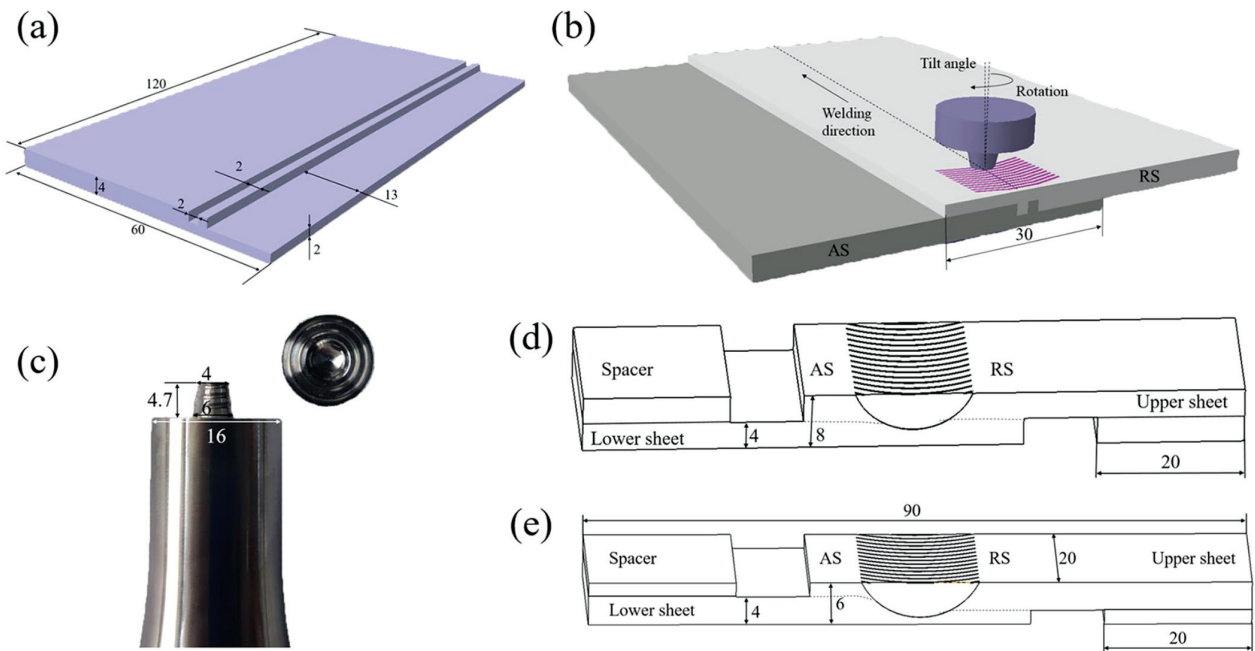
Dimensions of FSLW equipment and lap shear specimens: a) Base material, b) Schematic of PFSLW process, c) Friction stir welding tool, d) FSLW lap shear specimen, e) PFSLW lap shear specimen
